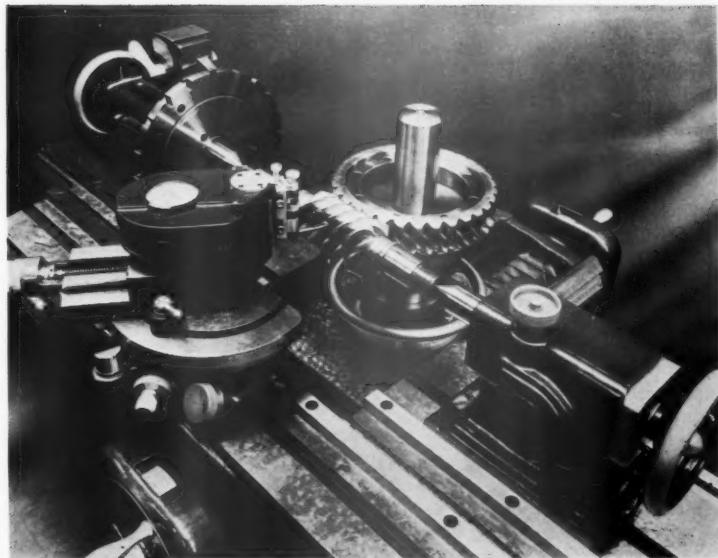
Worm gears in testing machine showing measurement of worm thread profile in progress.
